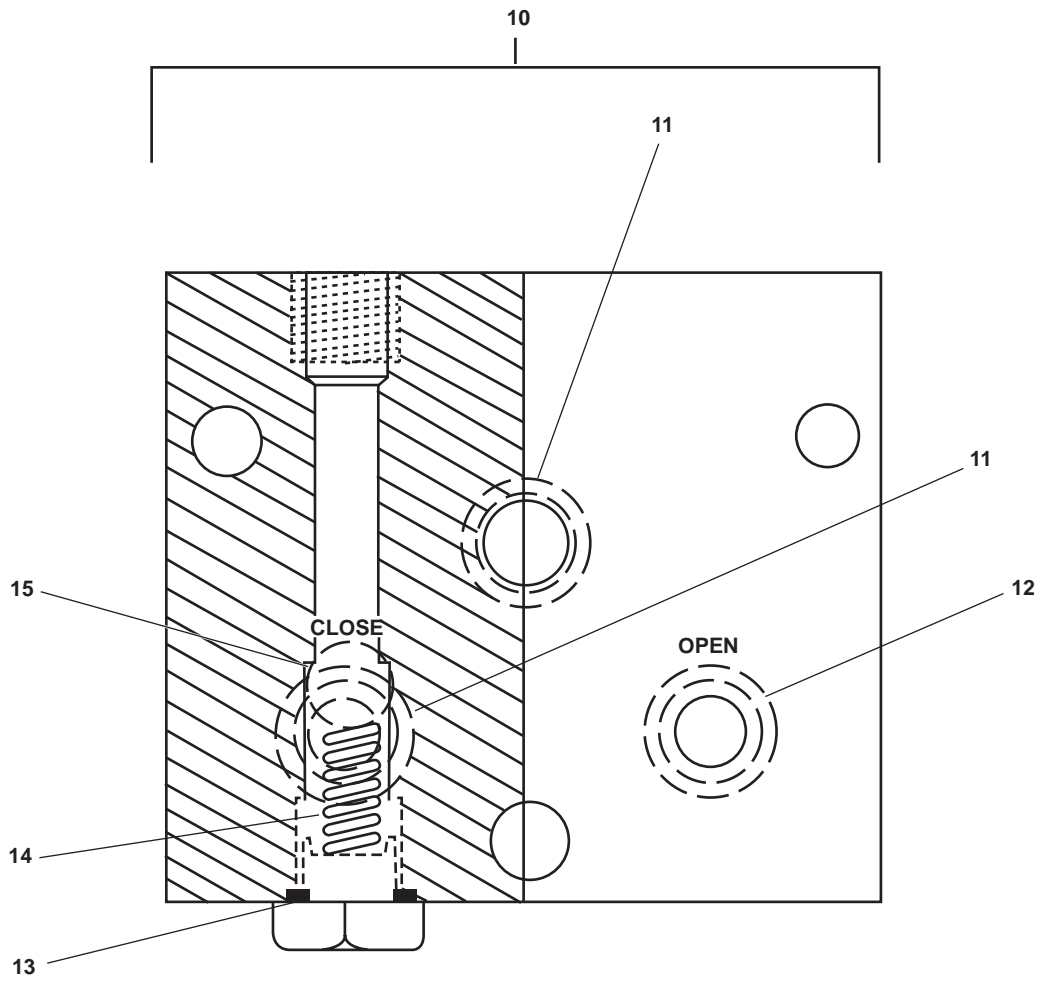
Hydraulic Watertight Doors (Sheet 3 of 9)
